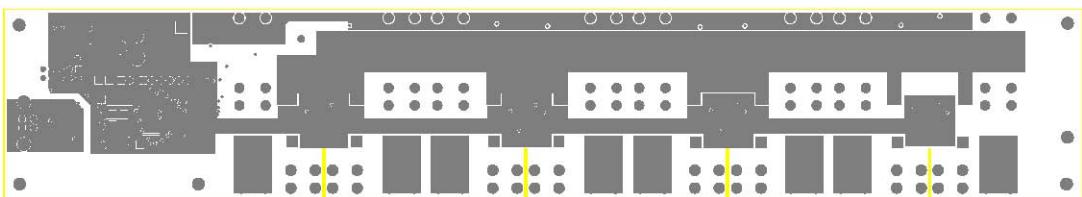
78M6618 PDU1 Evaluation Board PCB GND View
